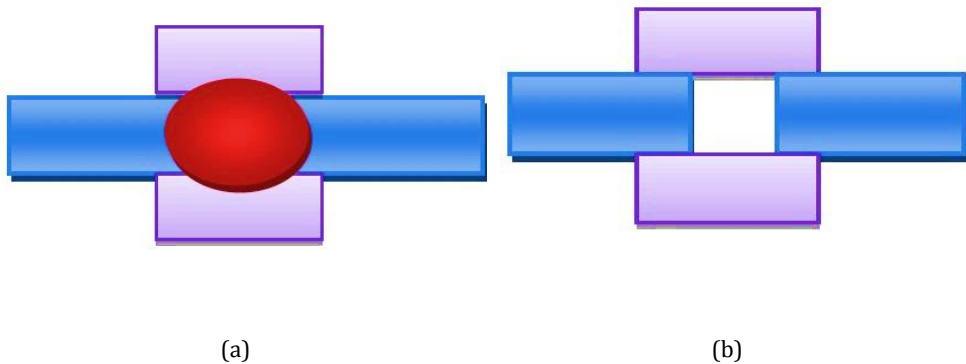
ESW connection scheme, a) Before welding, b) After welding.
